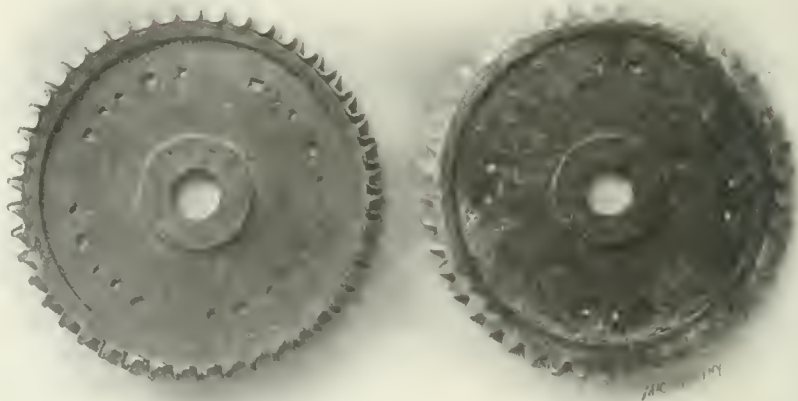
Rolled Gears before and after the Flash is trimmed from the Ends of the Teeth
